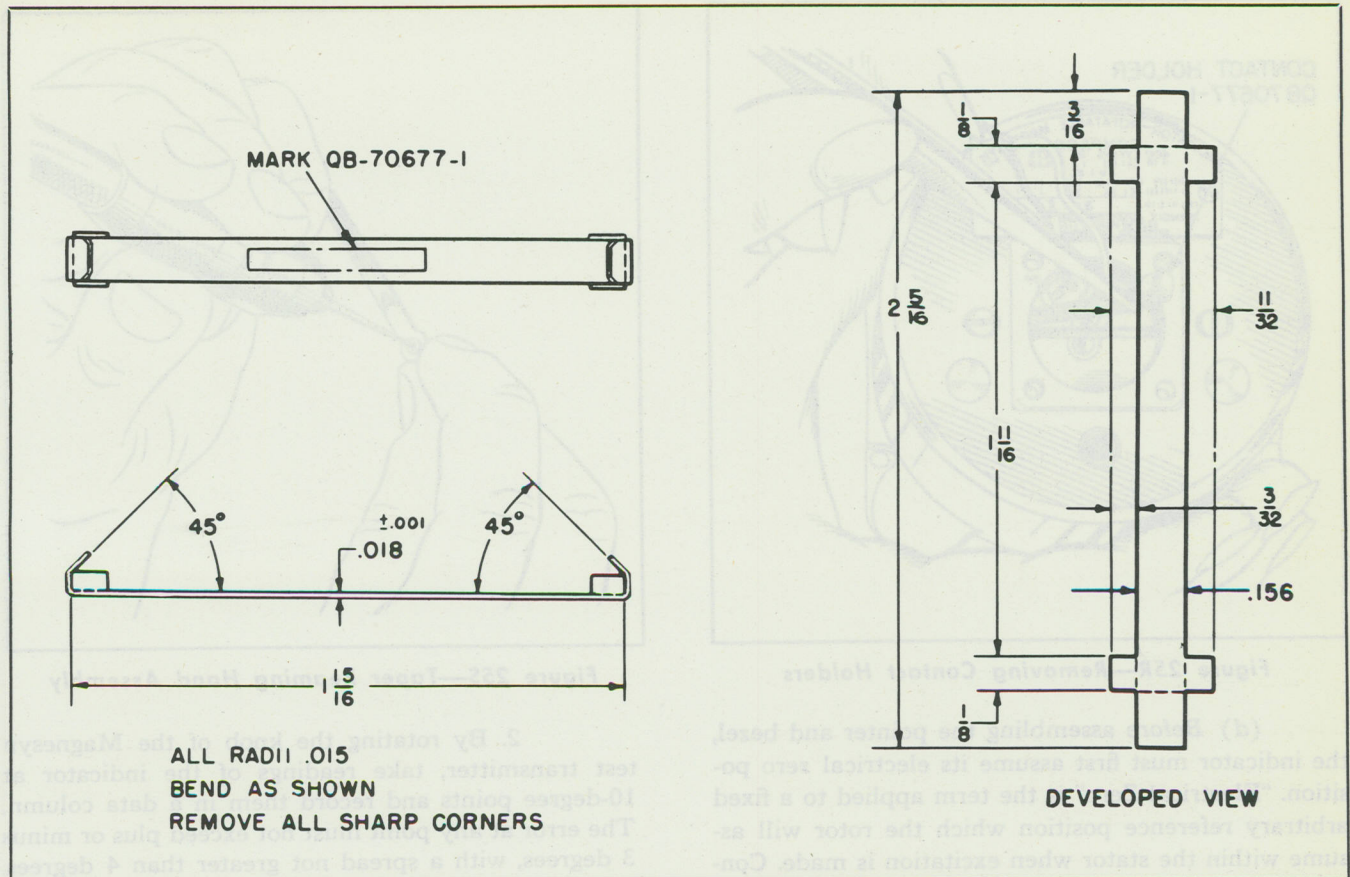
Q—Dimensional Drawing—Contact Holder, QB-70677-1
